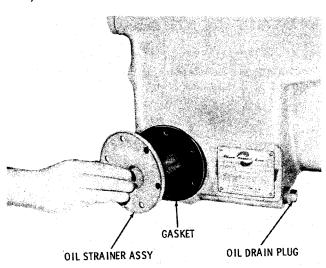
Removing oil strainer and gasket (-1 model)
